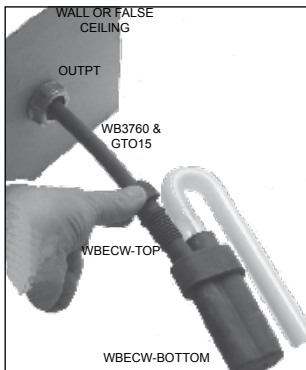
Exploded view of all necessary parts for a WETBITS End Cap Wide (WBECW) border tube installation with double back electrodes. A minimum of 7" from each end of the electrodes wire lead is required for proper installation of double back.
